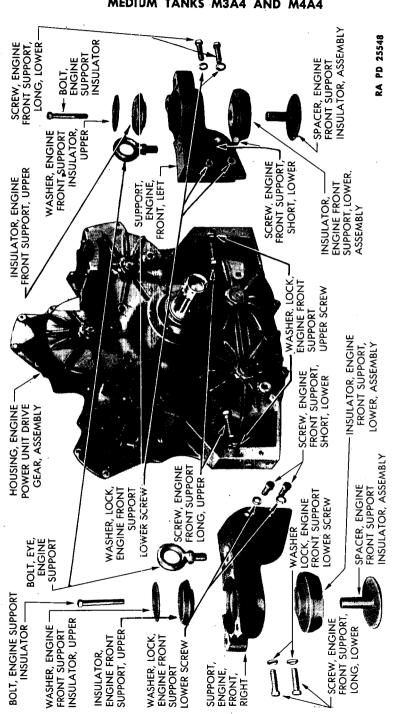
Engine Drive Gear Housing And Front Supports, Exploded
